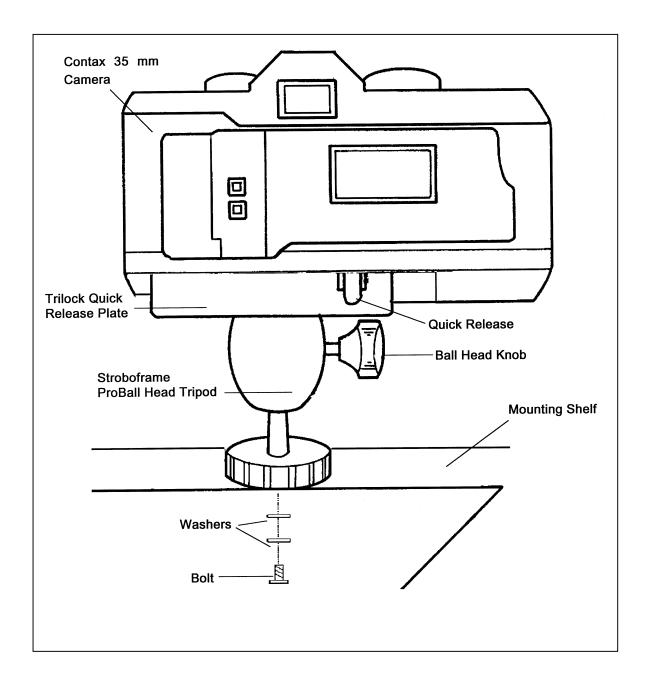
Automatic 35 mm Camera System Tripod Assembly.
